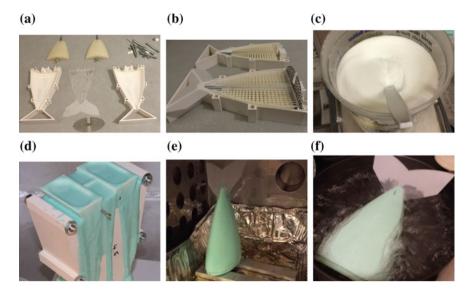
Final fabrication steps of the silicone rubber fish tail. a Individual parts of tail mold assembly.
